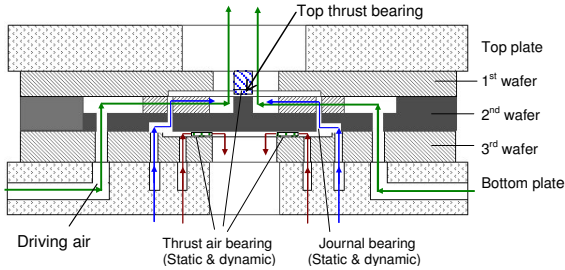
The schematic diagram of the micro turbine device. Three flow paths are for driving air, static journal bearing and static thrust bearing. The dynamic thrust bearings are designed on the 1<sup>st</sup> and 3<sup>rd</sup> wafer dies.
